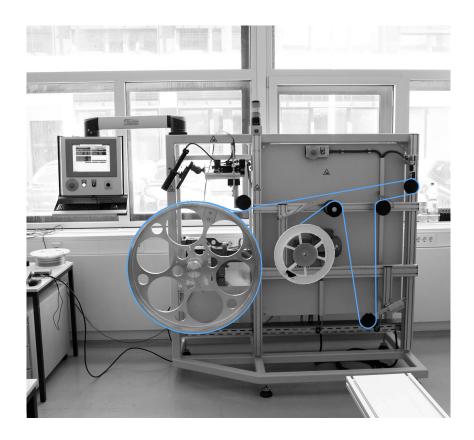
Winding machine for the serial production. The blue indicates the path of the fibre.
